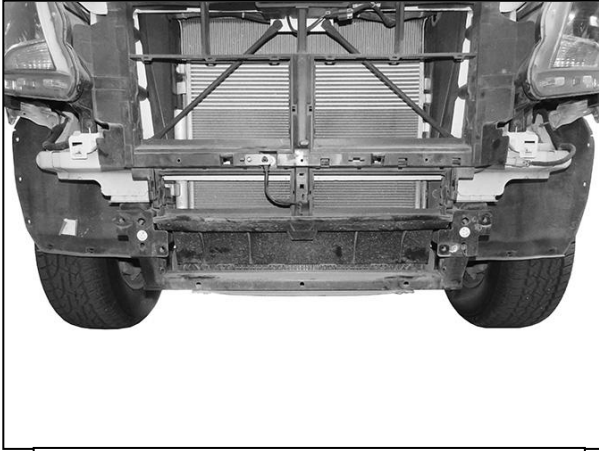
Remove hex bolts (arrows) to remove impact bumper (Passenger side pictured)
